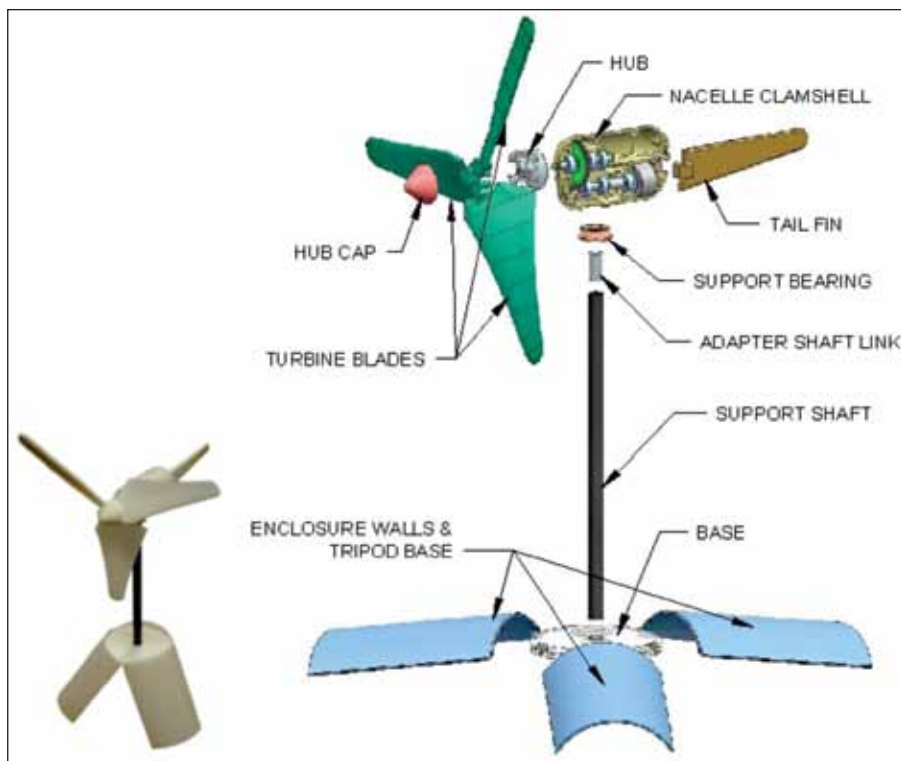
Fully assembled windmill prototype and exploded windmill assembly showing detail of components.
